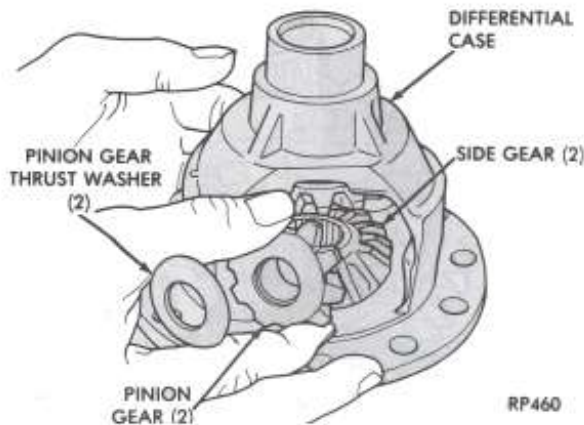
Remove or Install Pinion Gears, Side Gears, and Thrust Washers by Rotating Side Gears to Opening in Case
